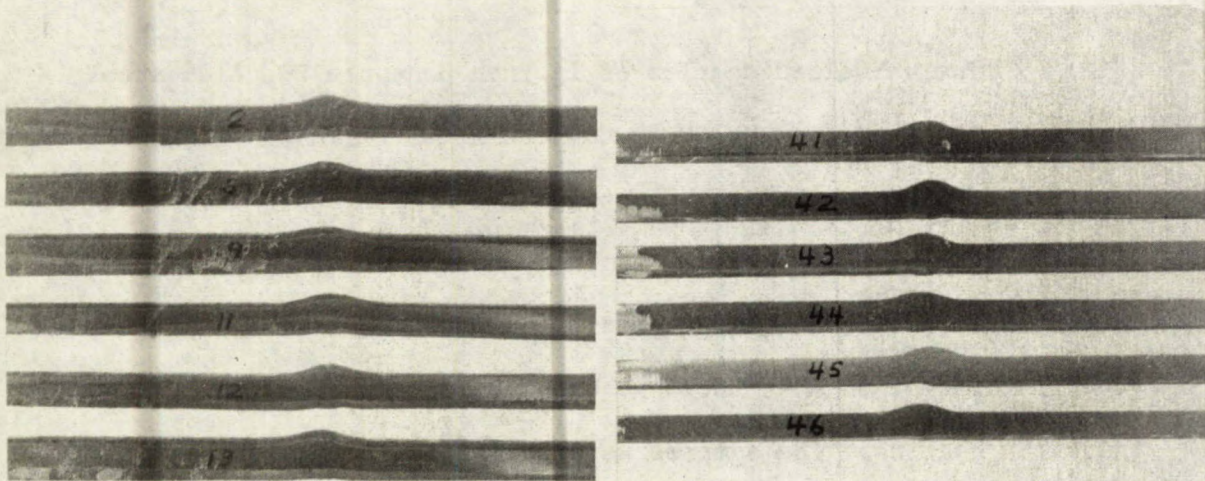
Sections of the welded joints (interior surface downward)
